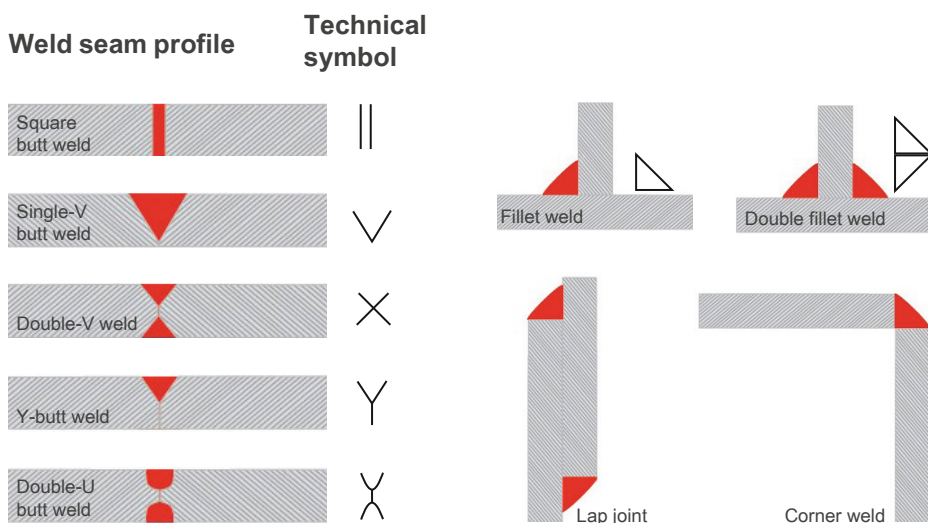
Weld seam profiles and their technical depiction.
